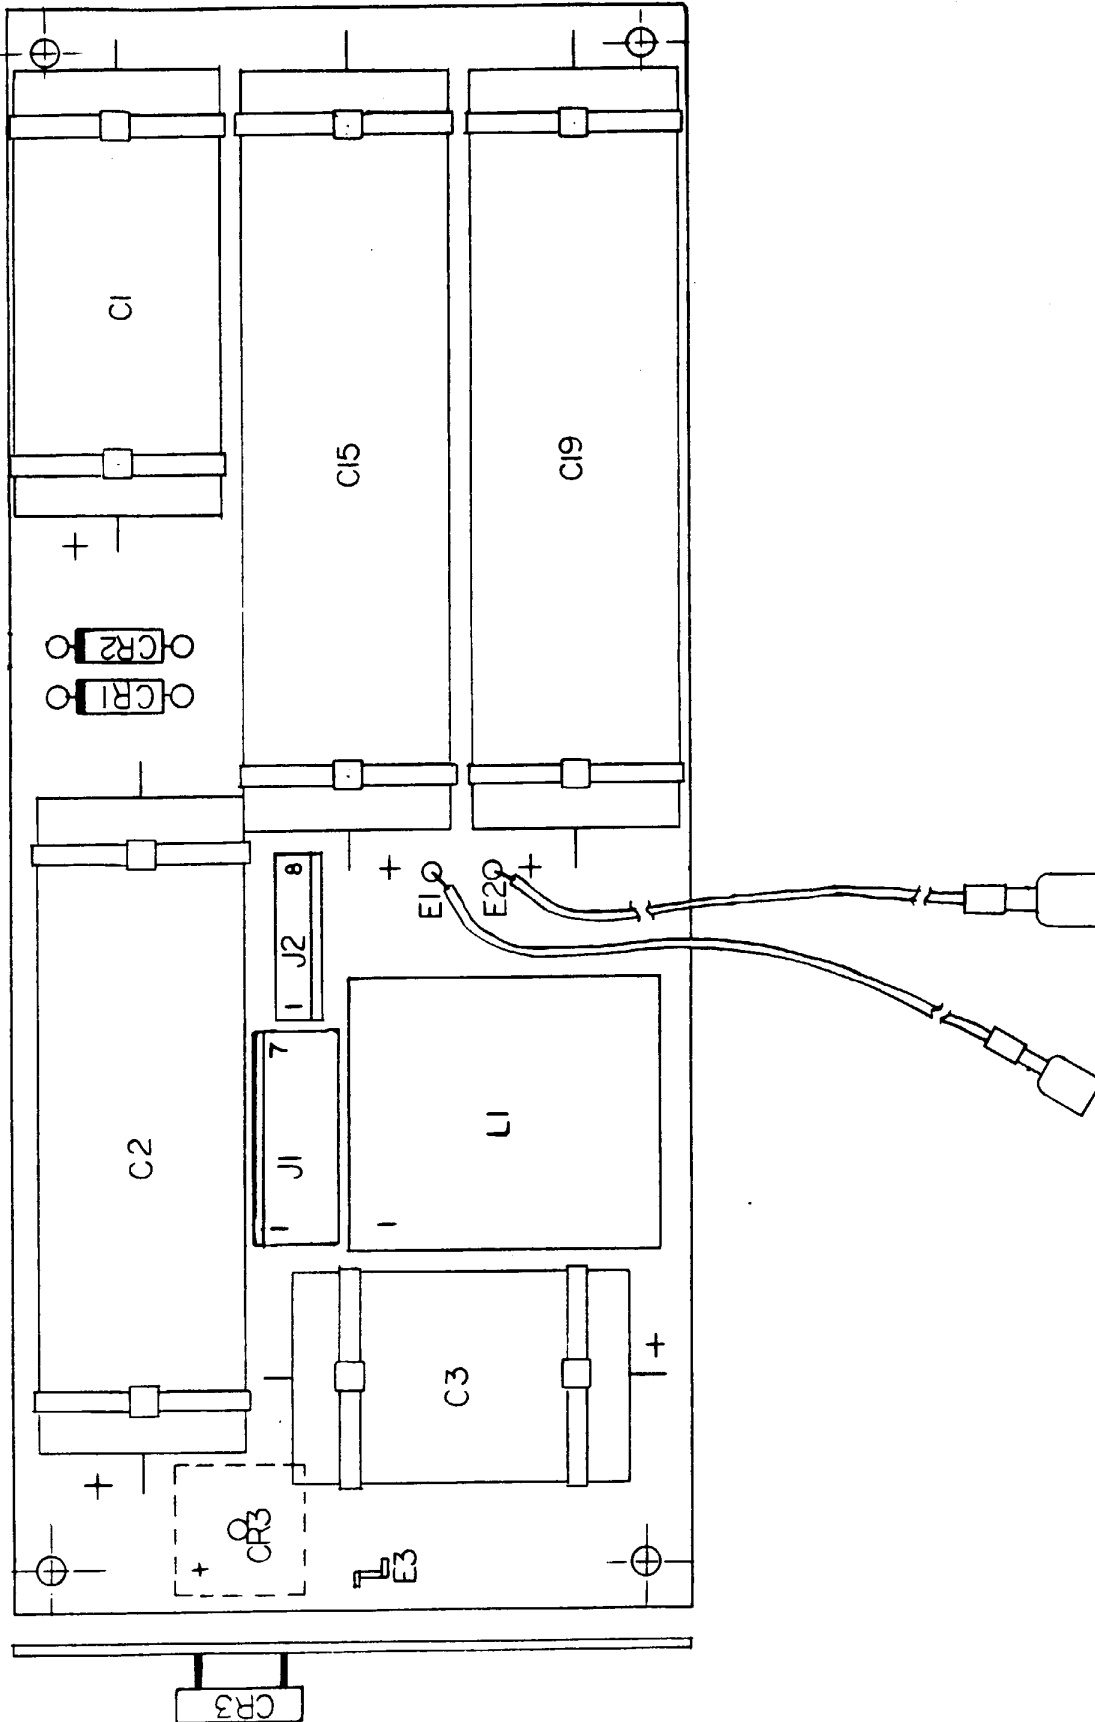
Power Supply Filter Board Assembly A15A1 Component Location Diagram (10073-3100, Rev. D)
